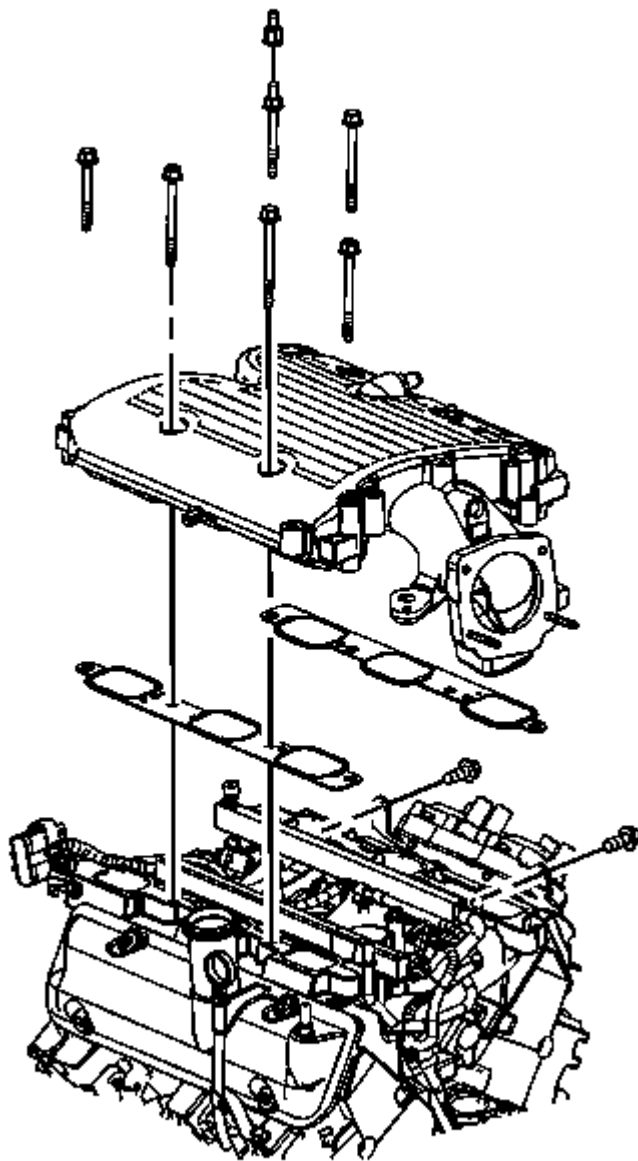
View Of Upper Intake Manifold & Lower Intake Manifold
